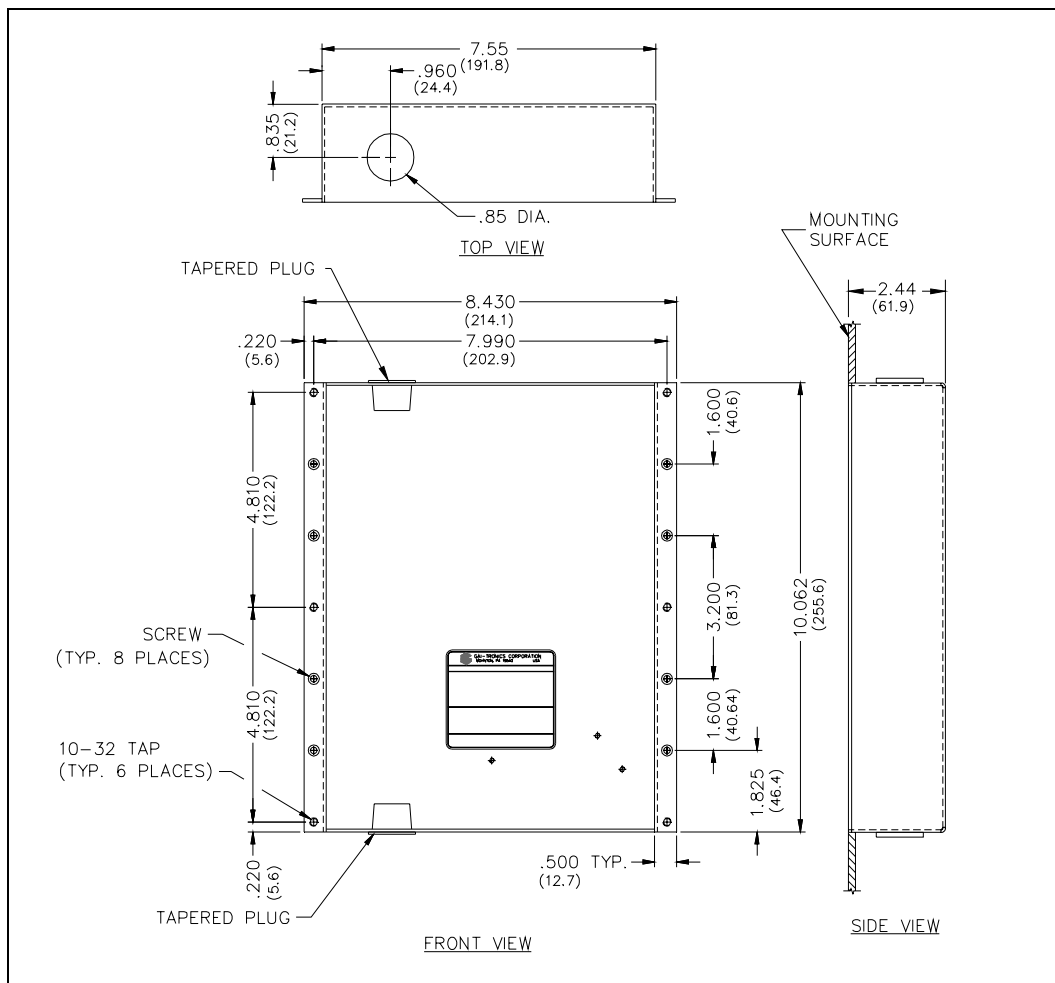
Model 297-003, 297-003TB1, 298-003 and 298-003HK1 Mounting Details
